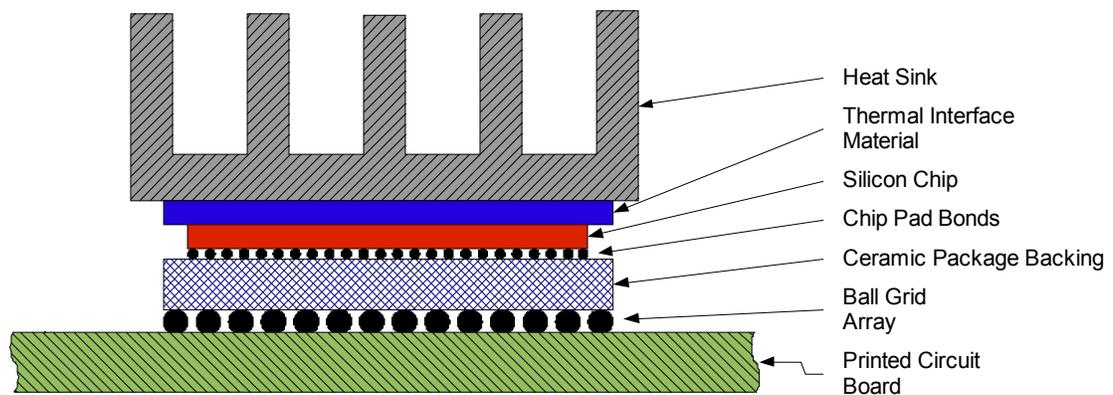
Cross-Sectional View of Chip and HeatSink Mounted on a PCB.
